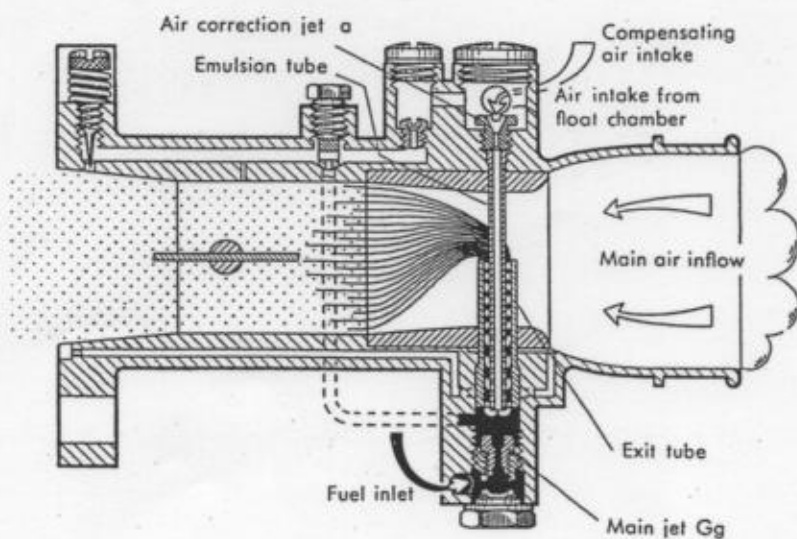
HR Downdraught Carburetter – Working Principle at Full Throttle
